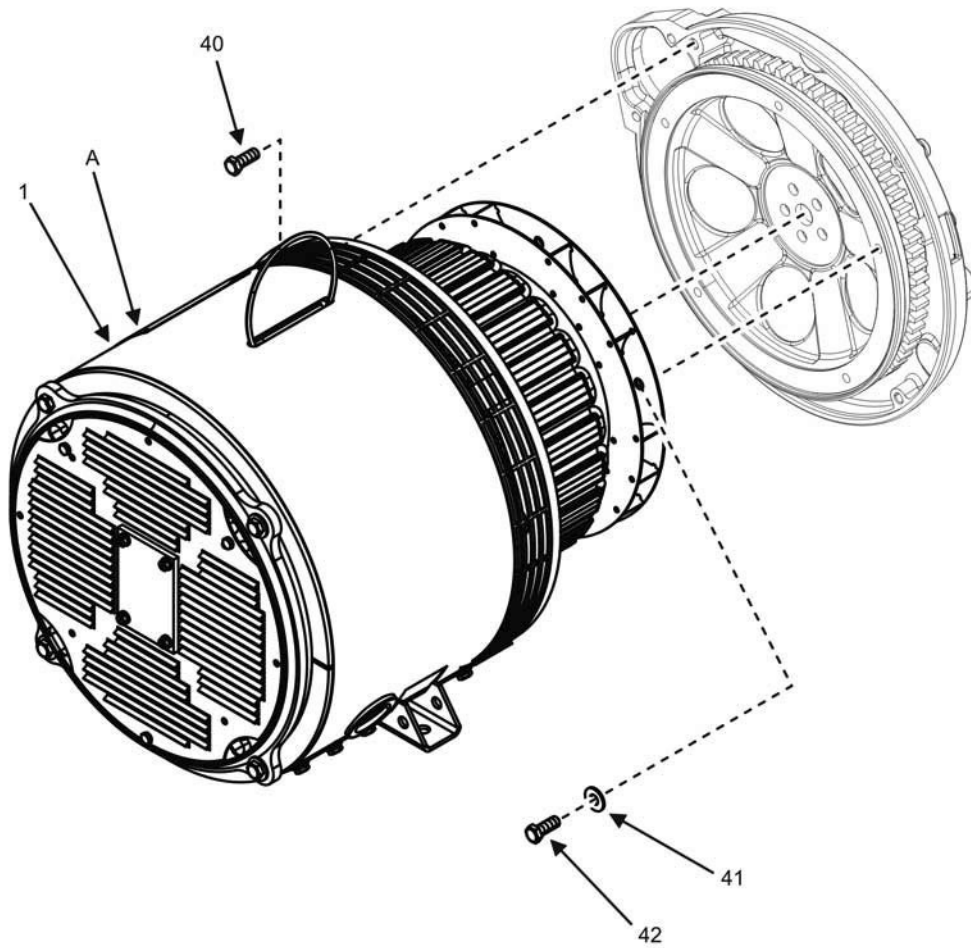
AC Generator Assembly, 400 Hz (Sheet 1 of 3).
